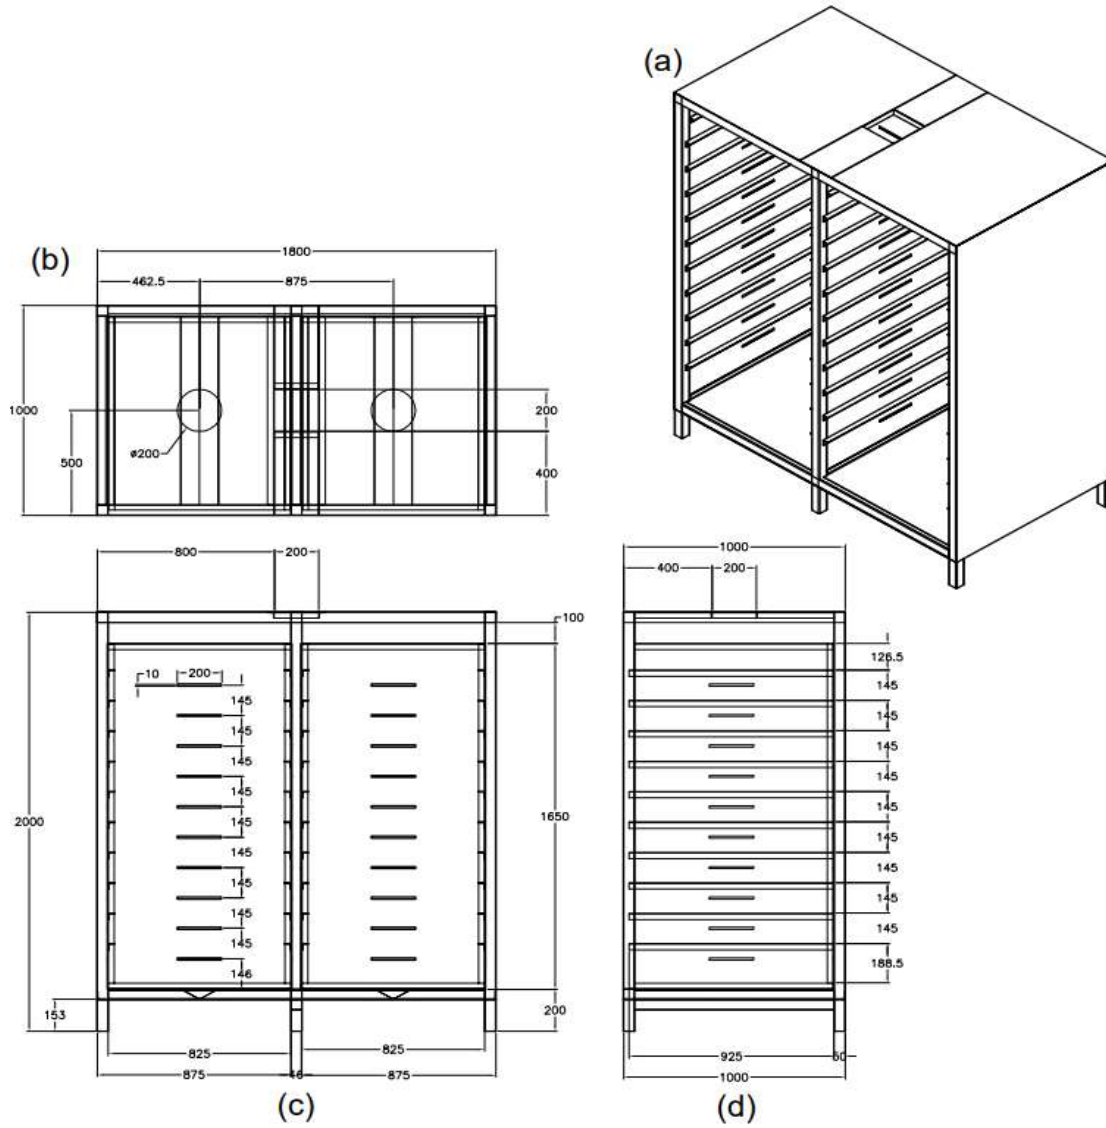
DED oven with LPG fuel. (a) Three-dimensional view; (b) Top view; (c) Front view; and (d) Side view.
